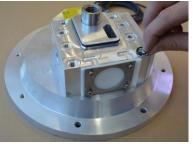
Unscrew back plate retaining screws [1202E] and [1203E].
